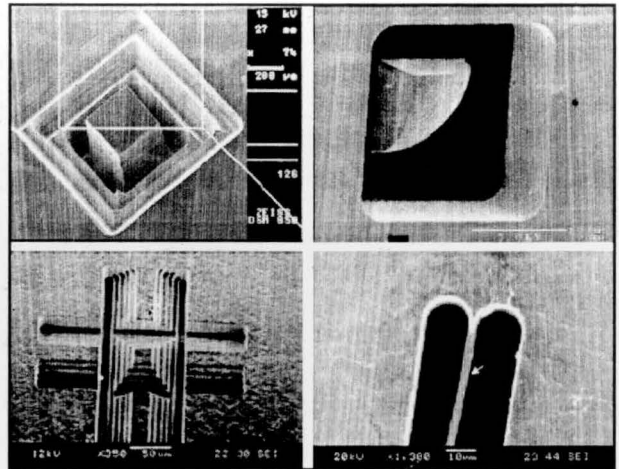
Example of 3D Micro-Mold Machining by Micro-EDM Milling
